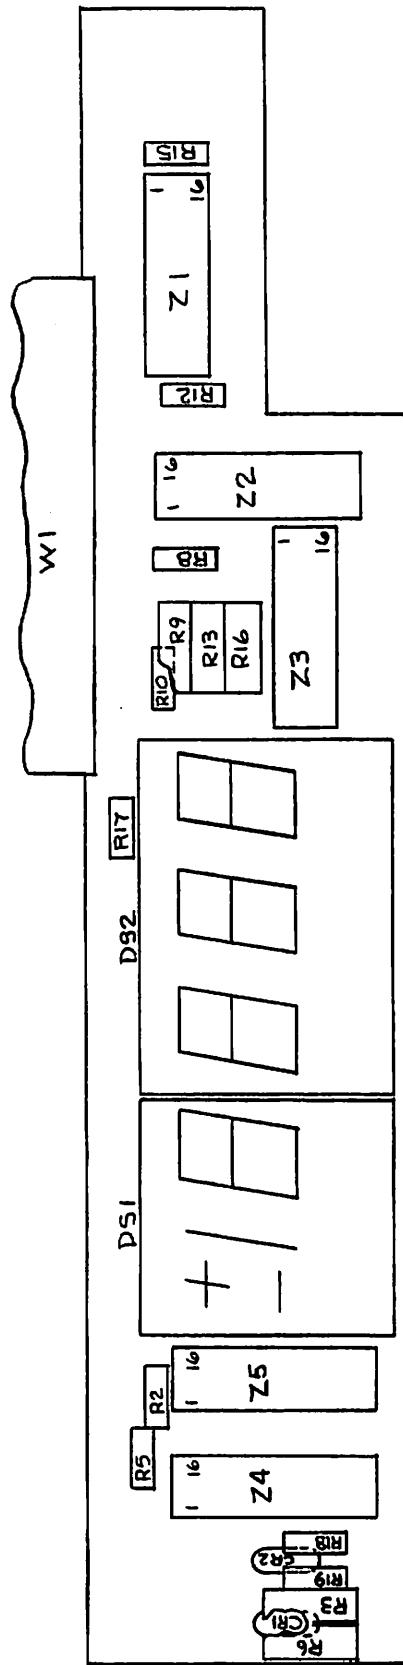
$\pm 180^\circ$ Display Board Option Parts Locator
